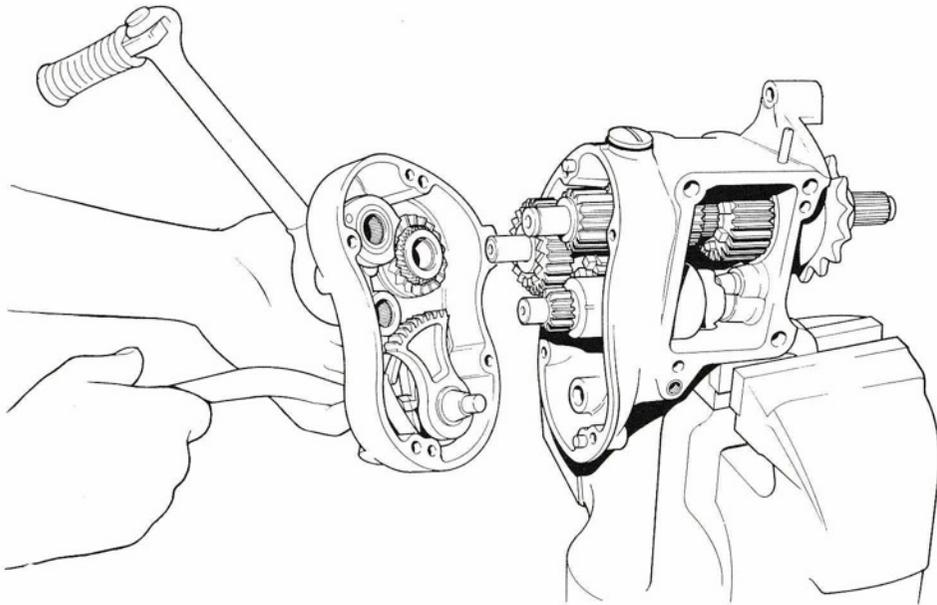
Gearbox (Transmission) showing Method 2 dismantling procedure.
